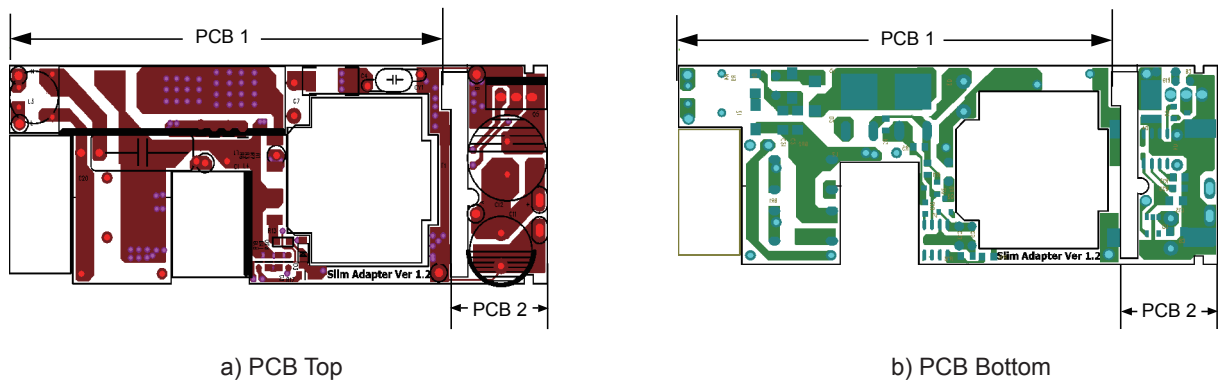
PCB Layout. Assembled PCB Layout is 86mm x 33mm x 13mm
